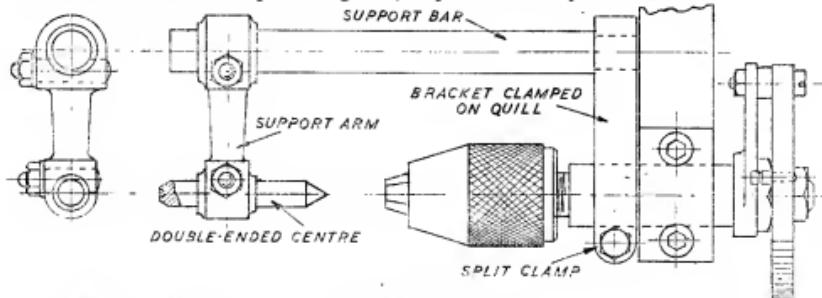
Plan view of fixture, with suggested attachment for supporting long pieces of work
